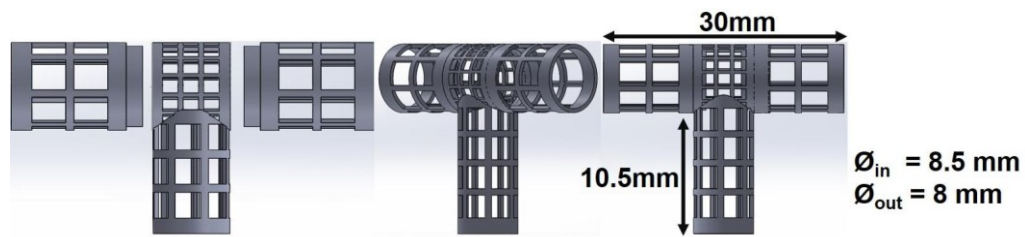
Dimensions of 3D printed bifurcating vascular graft mandrel.
